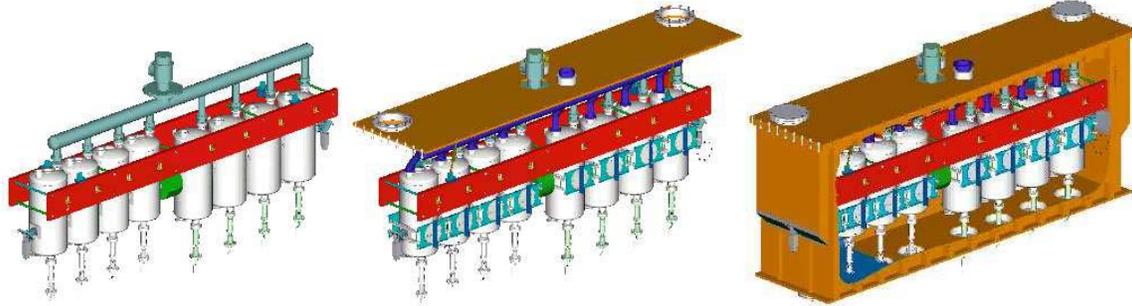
Box cryomodule assembly sequence showing (left to right) clean subassembly, sealed subassembly removed from clean area and suspended from top plate, and final assembly in vacuum vessel.
